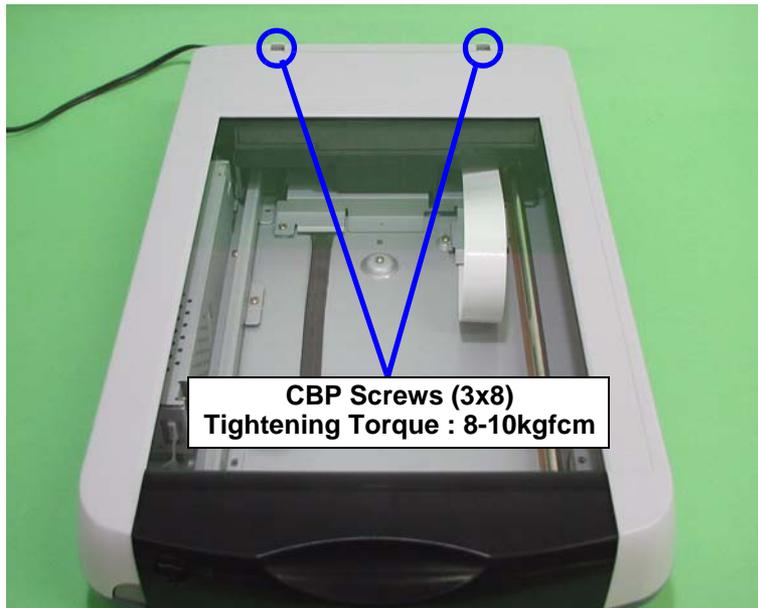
Upper Cover Removal (1) - Screw Positions
